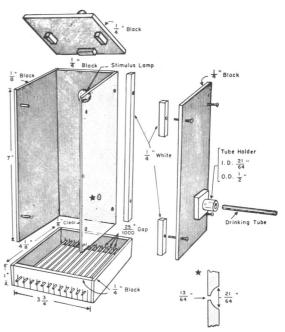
Exploded view of the conditioning chamber. The front of the chamber, made of $\frac{1}{4}$ " clear plexiglass is not shown. Standard international system of units equivalents for dimensions shown are as follows: 1 in. = 25.4 mm, $\frac{1}{4}$ in. = 6.4 mm, $\frac{1}{6}$ in. = 3.2 mm, 7 in. = 17.8 cm, $\frac{41}{2}$ in. = 10.5 cm, $\frac{3}{4}$ in. = 9.5 cm, $\frac{2}{64}$ in. = 8.3 mm, $\frac{1}{3}_{64}$ in. = 5.2 mm, $\frac{1}{2}$ in. = 12.7 mm, $\frac{25}{1000}$ in. = 0.7 mm. 341
